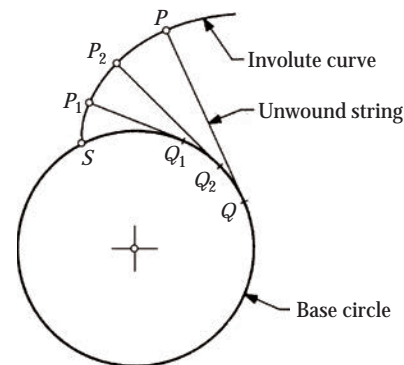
Drawing an involute of a circle by unwrapping string.
